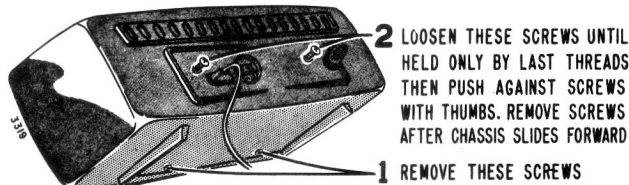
Rear View of Cabinet Showing Chassis Mounting Screws.
